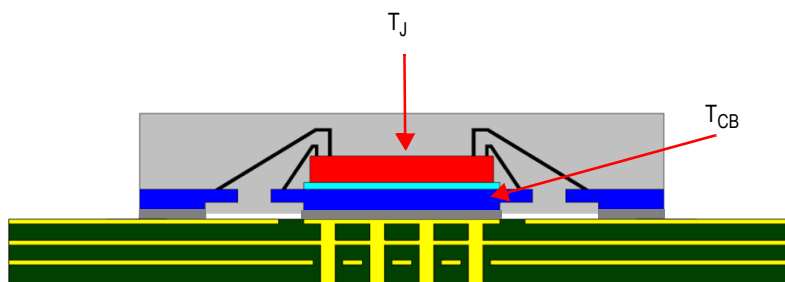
Assembly for Exposed Pad Thermal Release Path – Side View (Drawing not to Scale)
